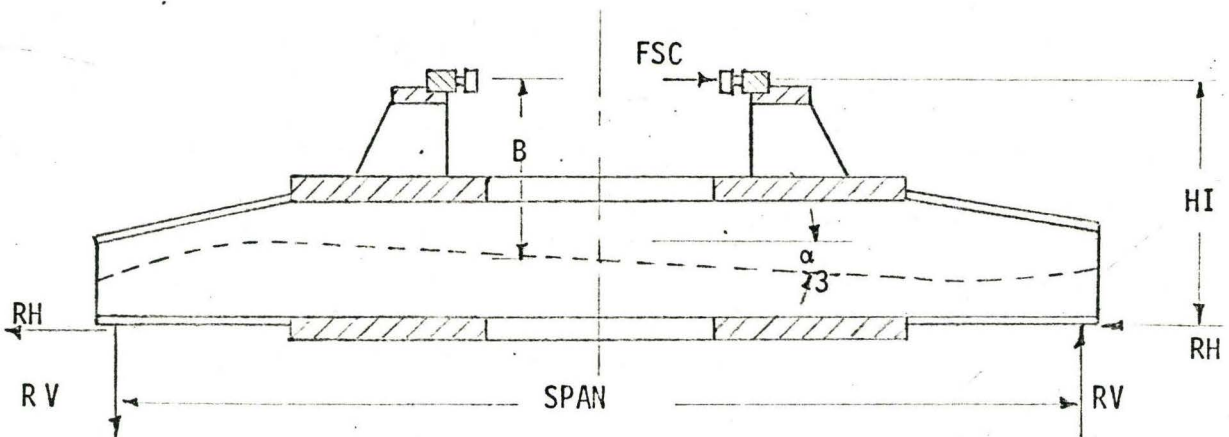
Schematic Section of Guide Bearing and Bracket Under Short Circuit Loading
